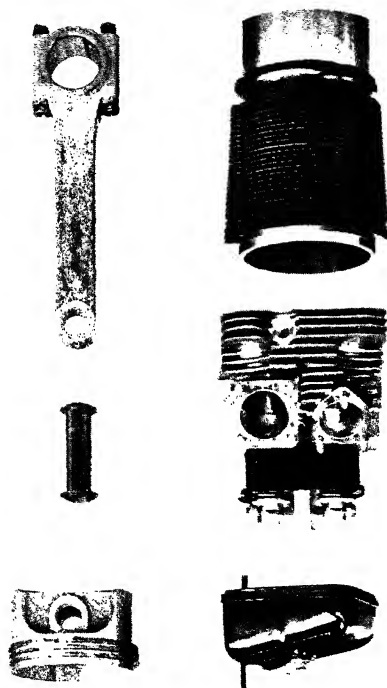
CYLINDER, CYLINDER HEAD AND VALVE GEAR, PISTON AND GUDGEON PIN, AND CONNECTING ROD.
